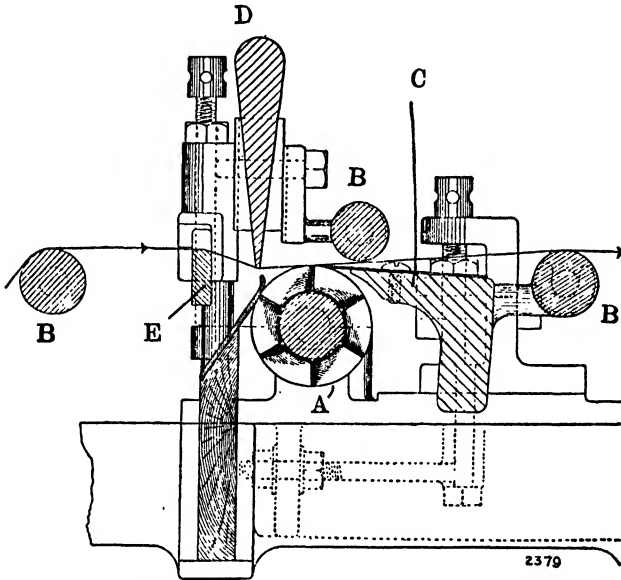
Section through a six-bladed helical cutter, ledger blade, and faller beam.
